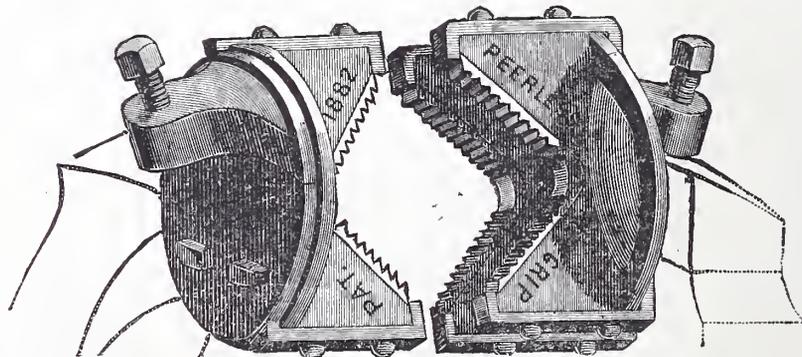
Enlarged View of the Clutch, showing Construction.
